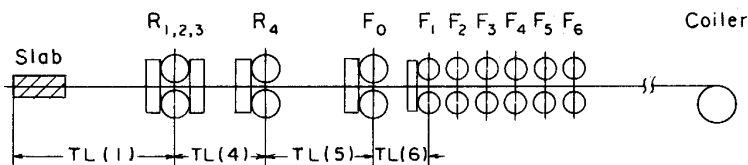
Outline of mill arrangement in three quarters continuous hot strip mill.
